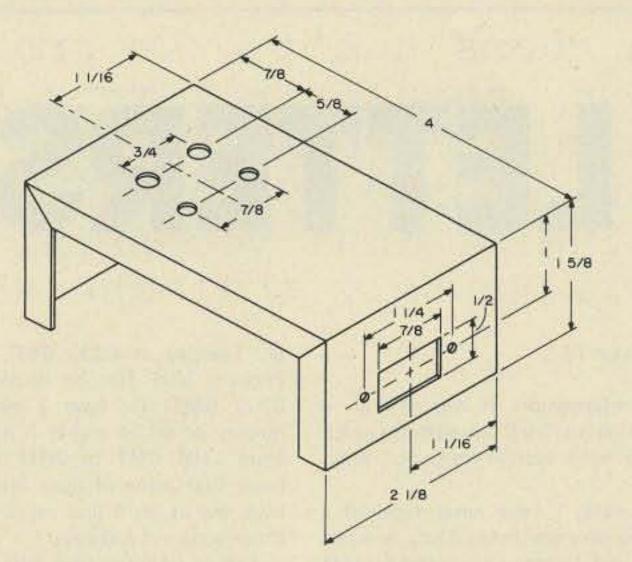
Hole pattern for a 4 x 2-1/8 x 1-5/8 inch box. Cut holes to fit parts on hand. Holes are centered on centerline of box.
